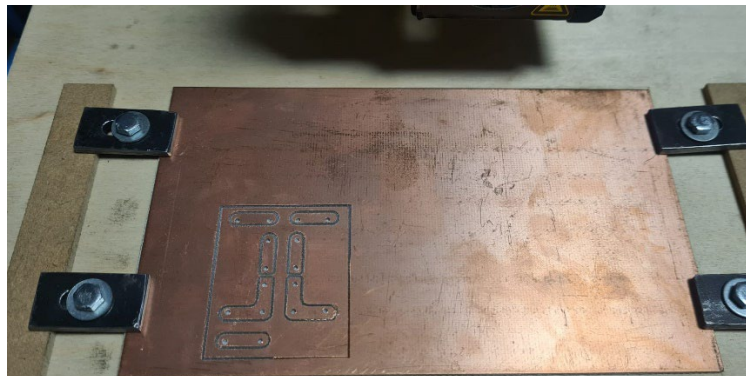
A PCB with milled tracks and drilled holes for mounting electronic components
